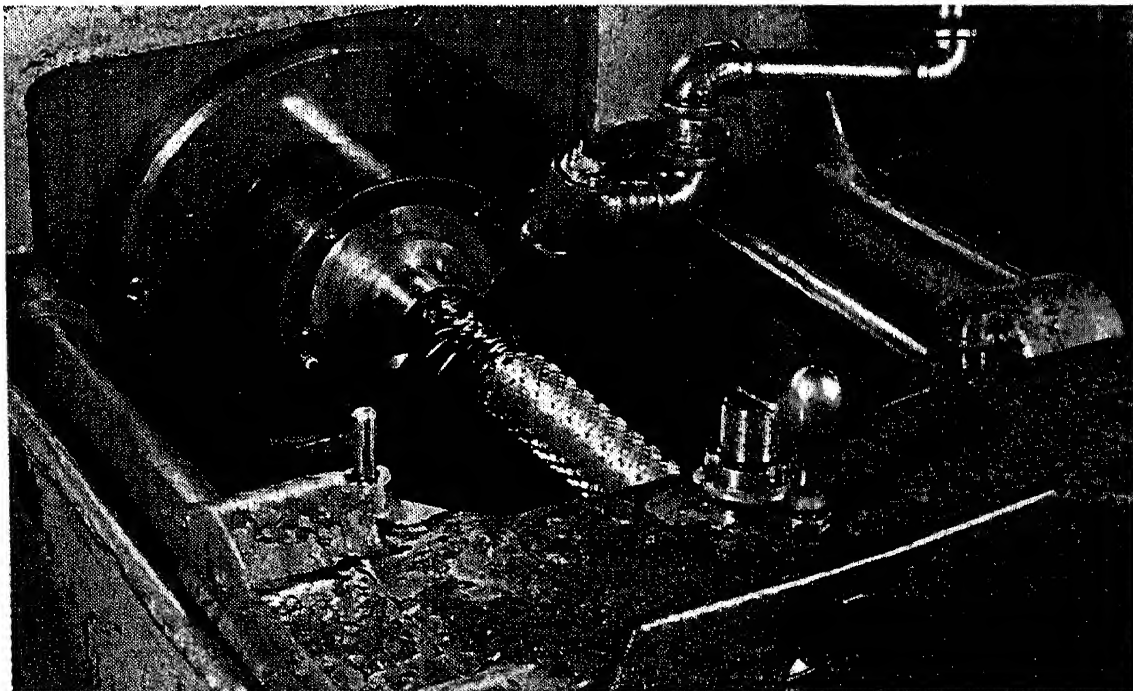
An internal helical spline being broached on a horizontal pull type broaching machine. (Courtesy Colonial Broach Co.)
